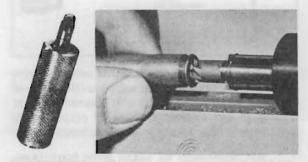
Pocket reamers may be of the simple hand-held type (left) or in the form of an accessory for a lathe-type trimming tool. Shown at right is the pocket reamer used with the versatile Forster case trimmer.
